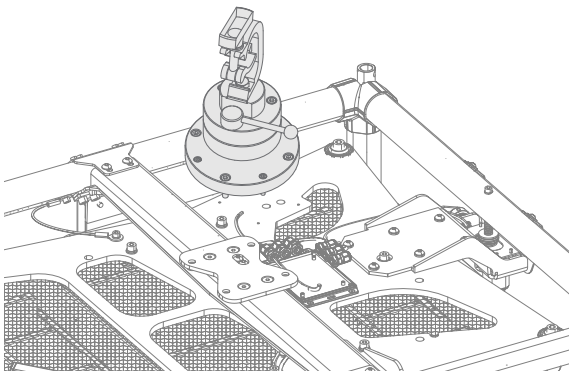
Example of installing a single point hanger on the bottom side of the frame
